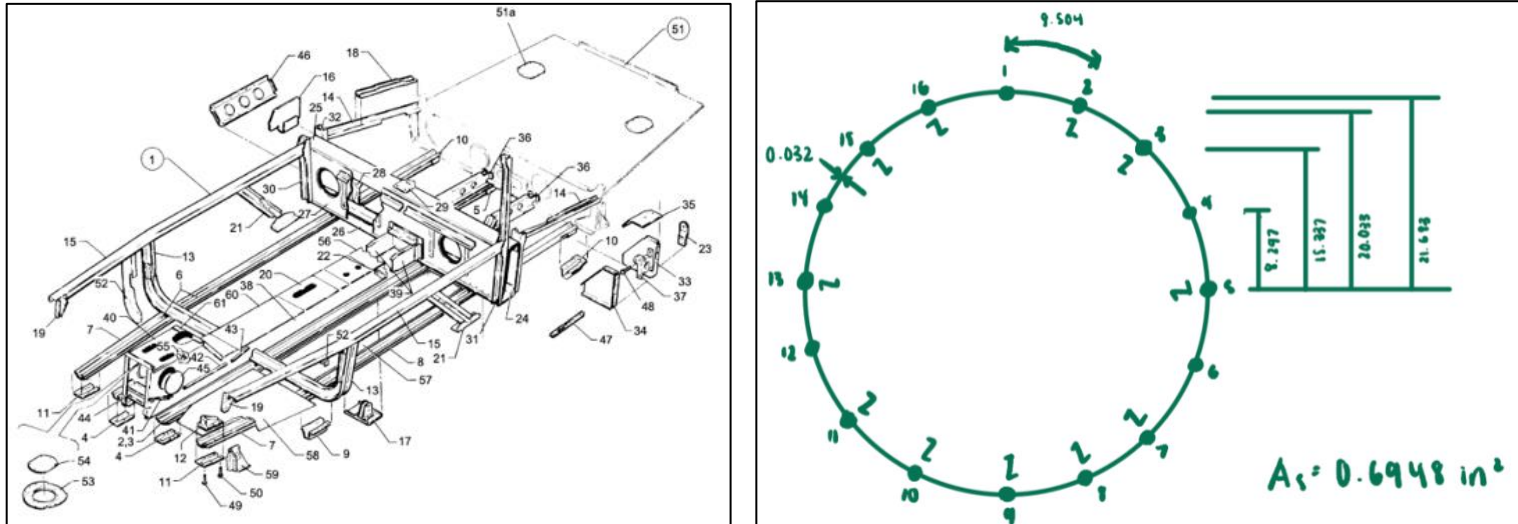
Fuselage Lower Forward Cockpit Assembly, Idealised Fuselage Cross Section Drawing
